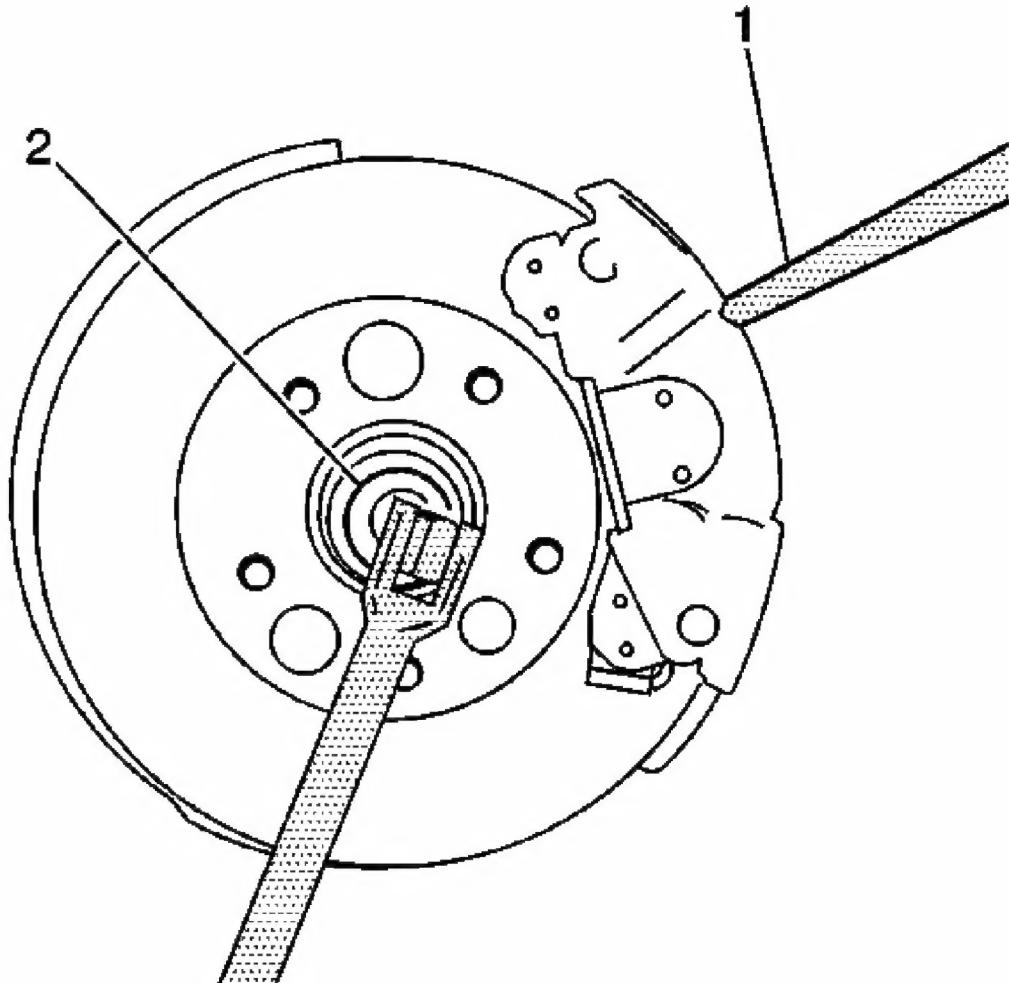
Preventing Rotor Turning Using Drift Or Punch
